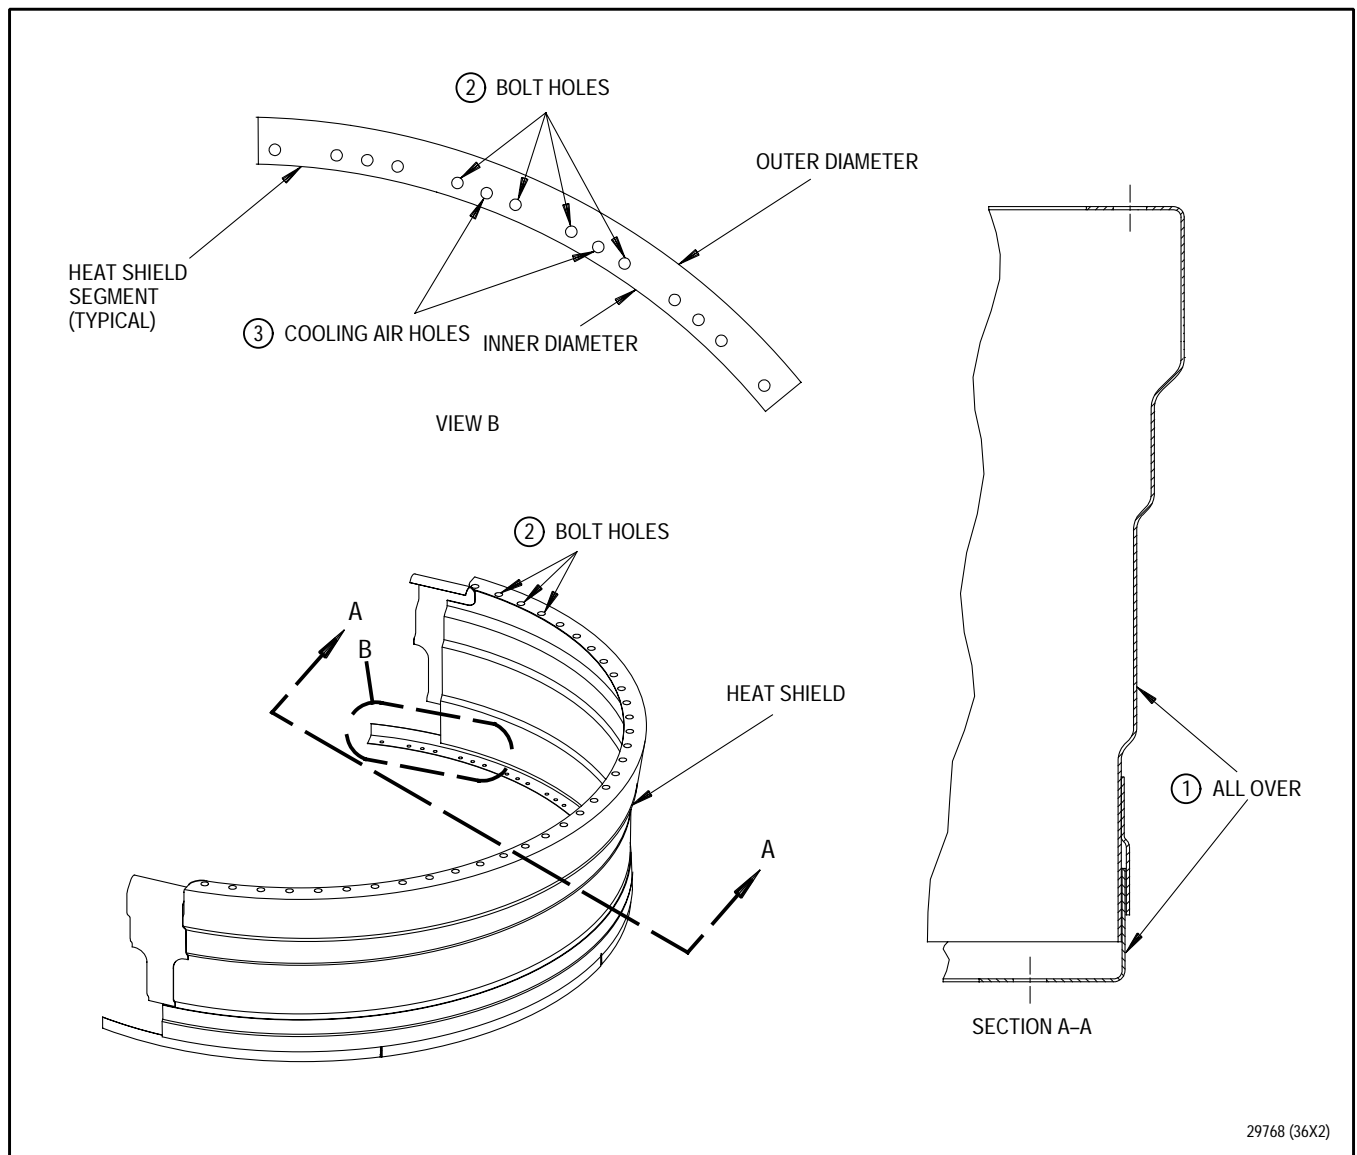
Compressor Stator Heat Shield and Heat Shield Segments - Inspection
